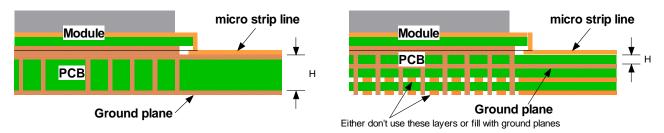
PCB build-up for micro strip line. Left: 2-layer PCB, right: 4-layer PCB
